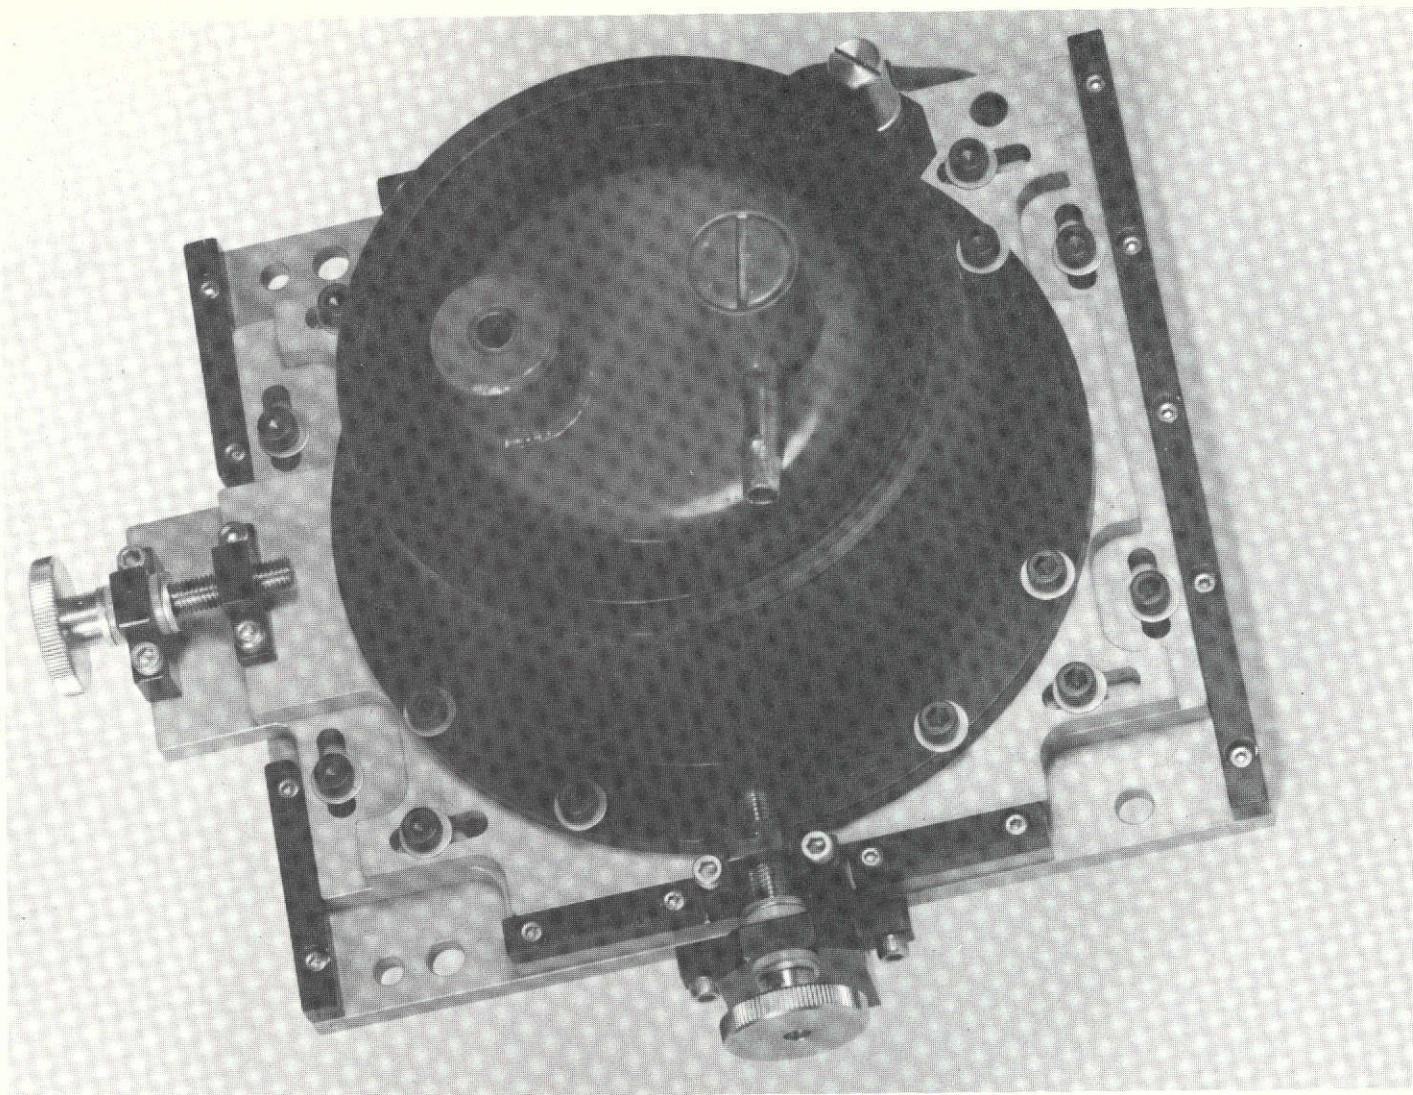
COOLED DETECTOR ASSEMBLY AND INTEGRAL POSITIONING FIXTURE
